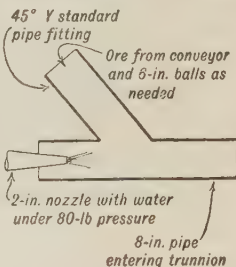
Sketch of ball-mill feeder at Hollinger.
